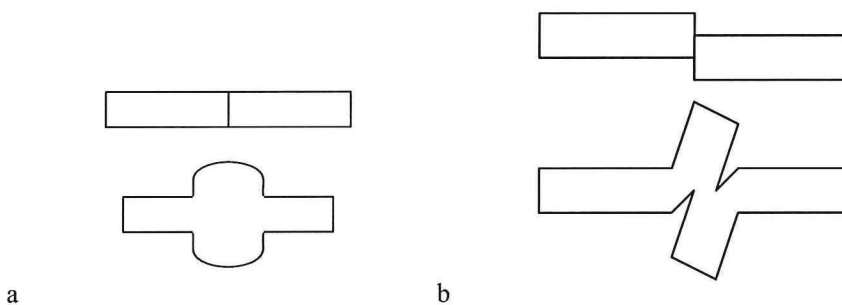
Possible alignments and weld forms: a) is a straight alignment, b) plates are shifted
